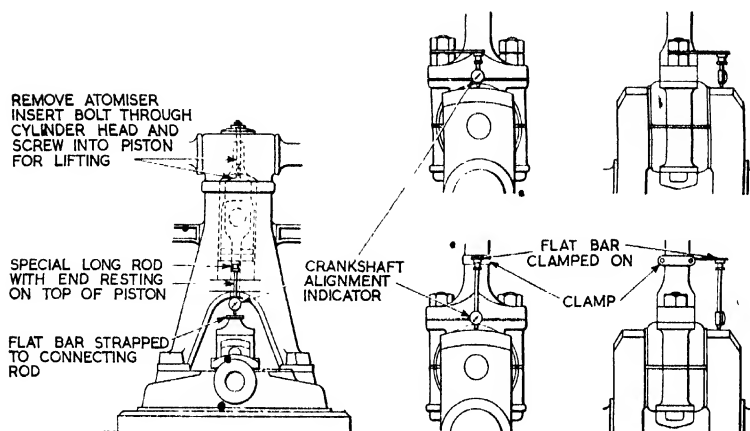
METHOD OF TESTING BEARING CLEARANCES WITH DIAL INDICATOR
